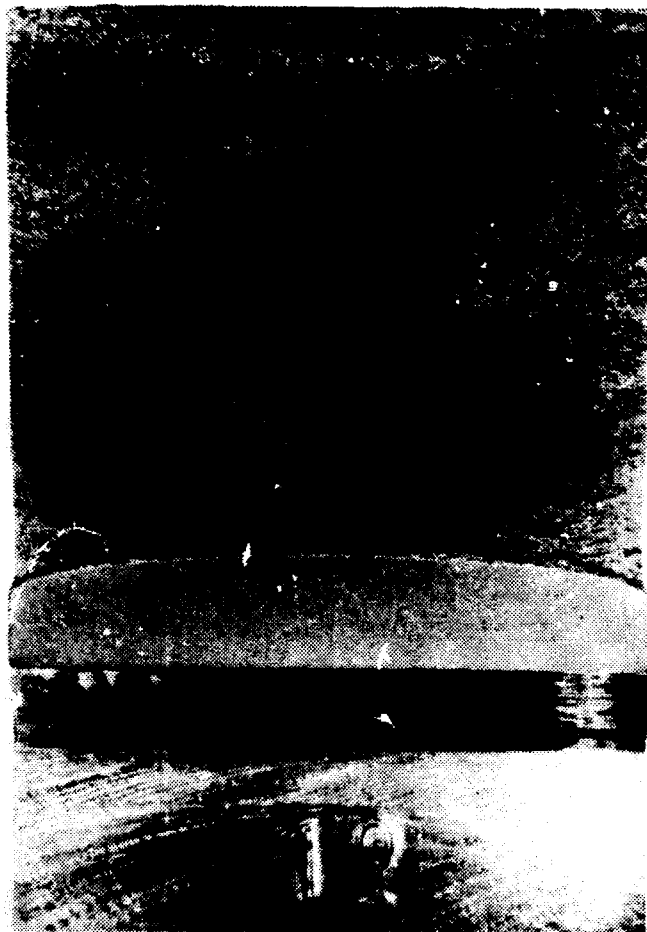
Fracture surface of a specimen tested at 20°C. The fracture is of a mixed mode with slow ductile crack growth preceding fast brittle fracture (the "pop-in" mode). The specimen was heat treated before the final separation of the fracture surfaces.
